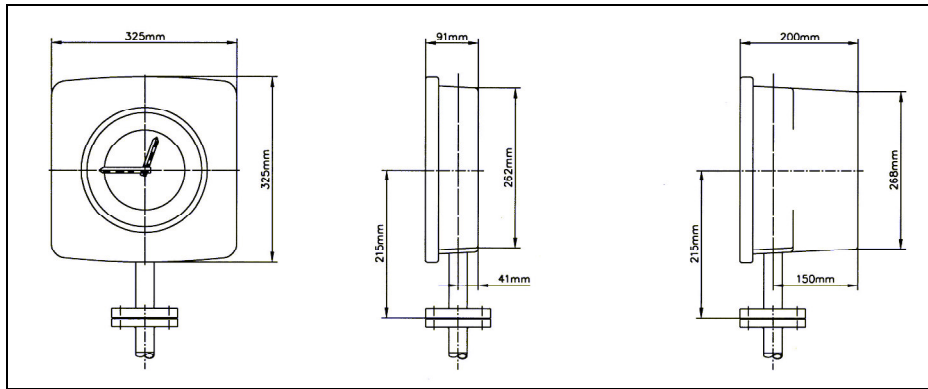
Maglink-Head with flat housing with wide housing (Ex-version)
